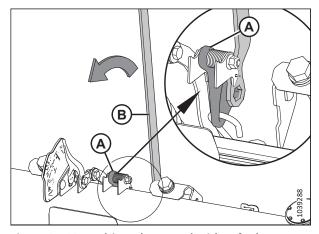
Multi-Tool Engaged with Left Float Setting Assembly
